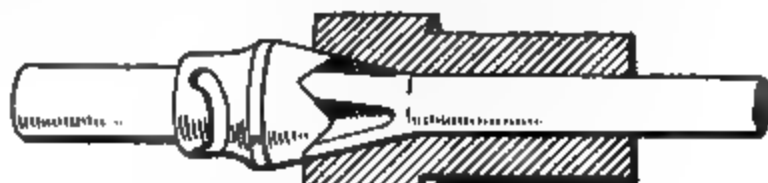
Leyner drill sharpener (Ingersoll-Rand).
